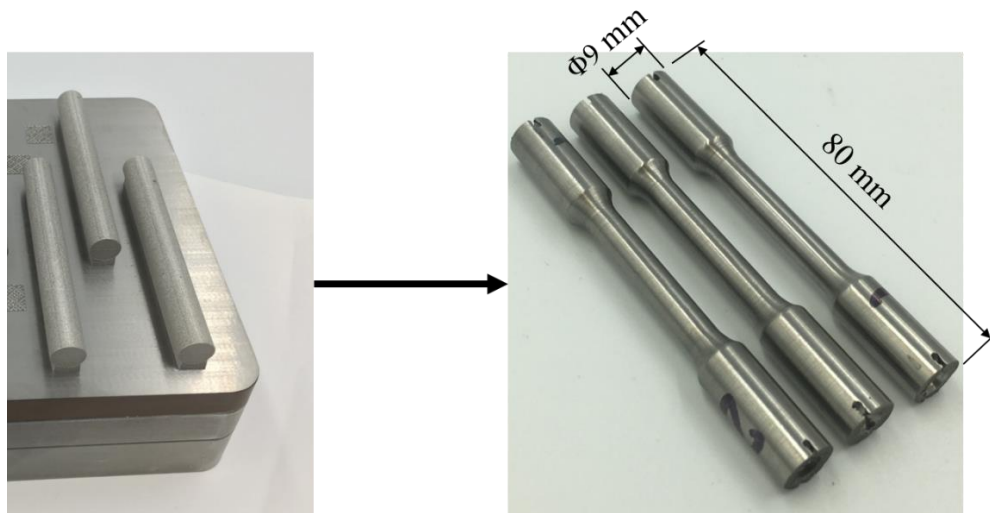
Horizontal cylindrical bars before and after being machined by a lathe.
